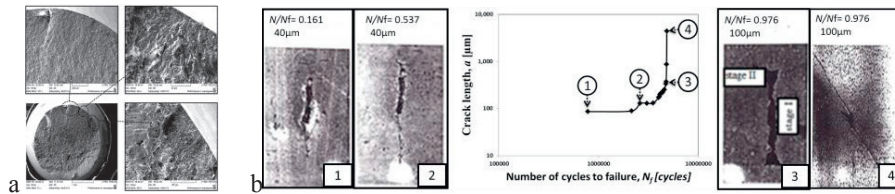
Images of failure development and fractured surfaces: (a) fractographic observations of the fractured surfaces of Specimen 7 ($\Delta\sigma=1200$ MPa) from Steel A specimens; (b) crack development at $\Delta\tau = 915$ MPa, Steel B, Air.
